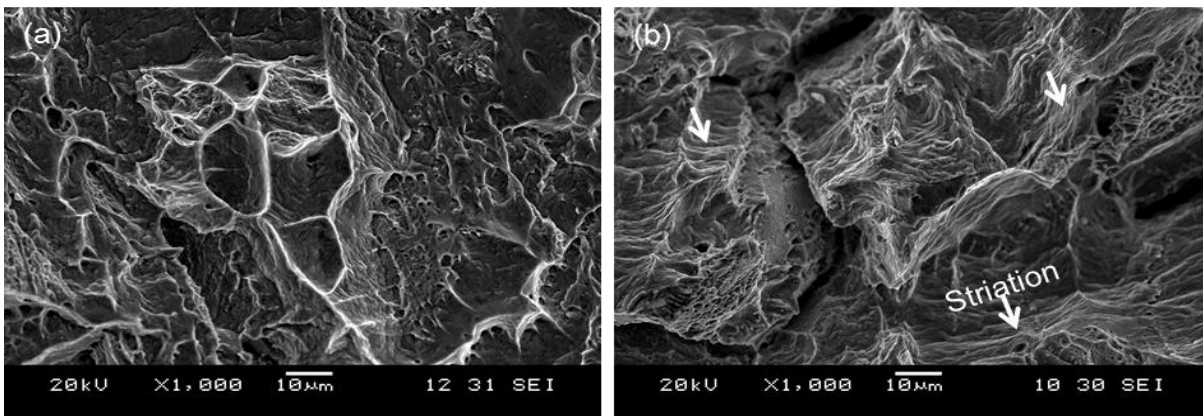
Fatigue fracture surfaces of C22 (a) in air, and (b) in 3.5%NaCl solution at pH = 6.8
